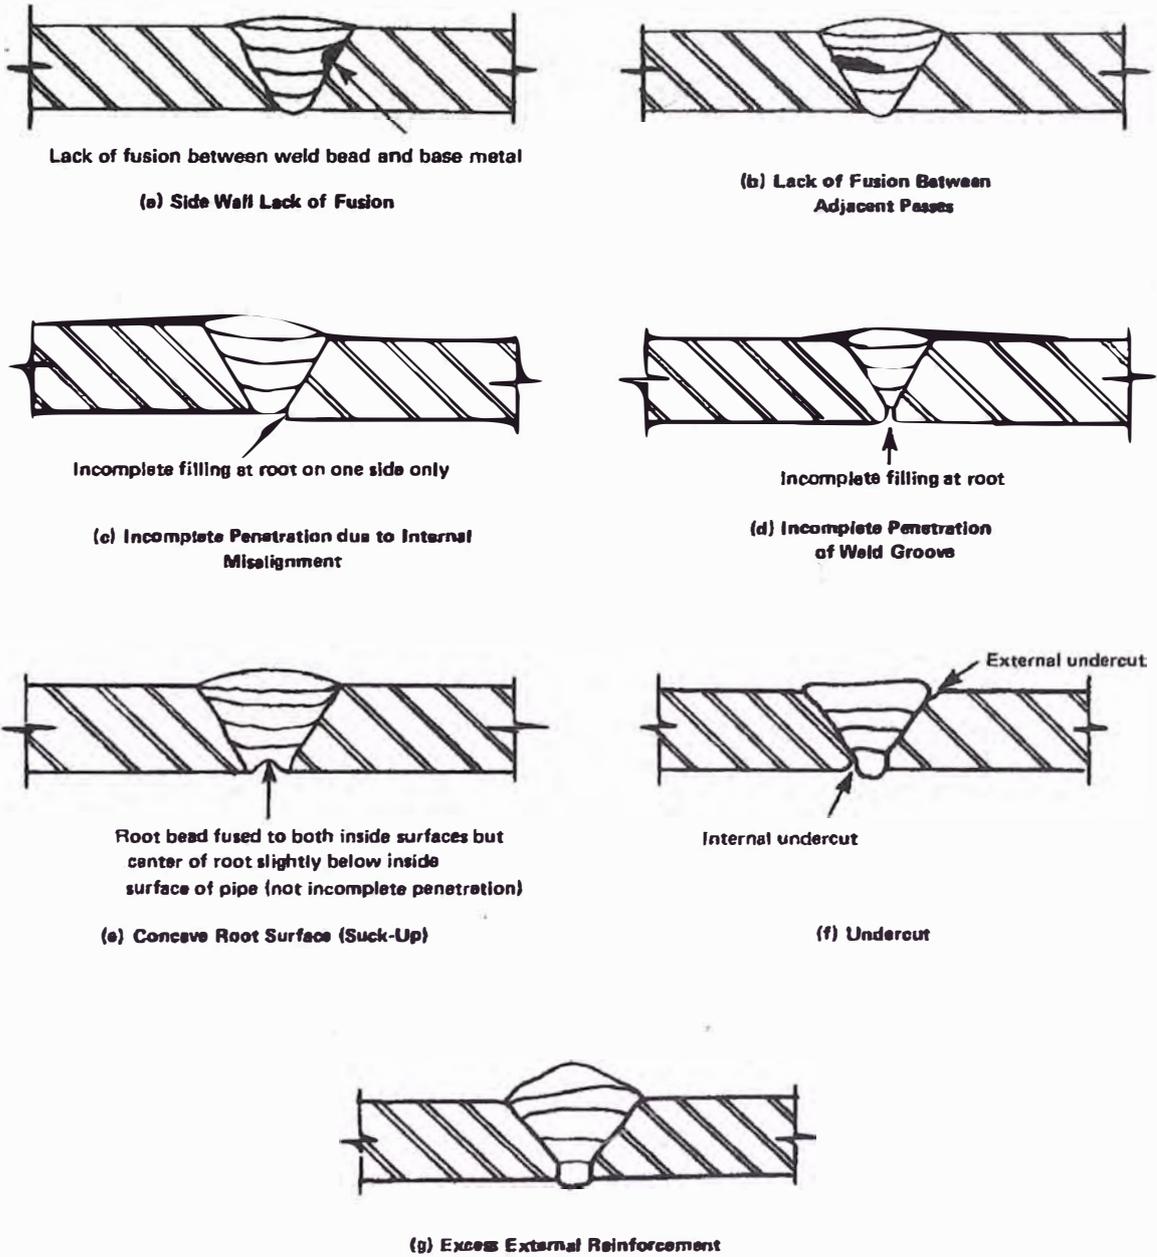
TYPICAL WELD IMPERFECTIONS
